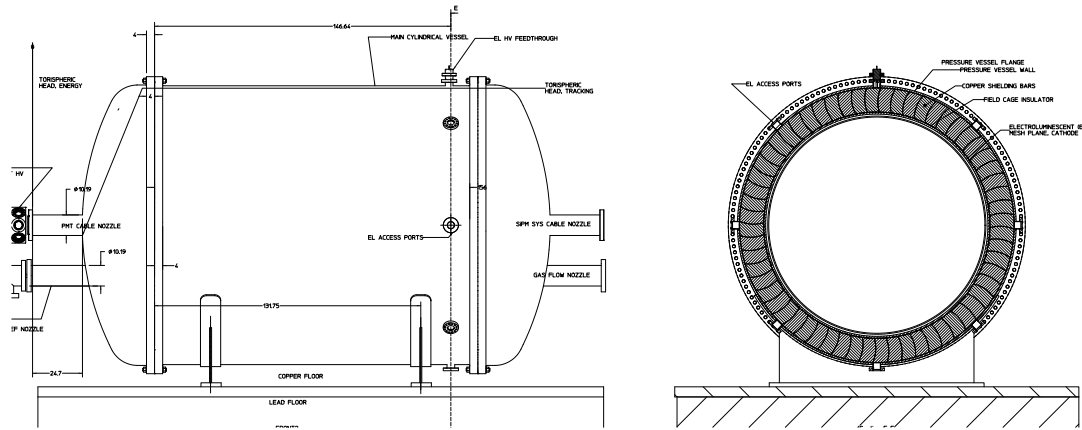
Pressure Vessel/Detector, Side and End Cross Section Views
